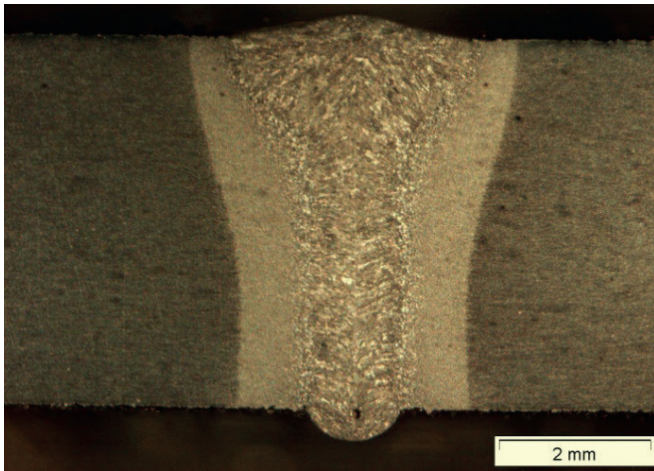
Macrostructure on cross section of the bead-on-plate weld produced at laser power 2500 W and welding speed 750 mm/min (heat input 200 J/mm)
